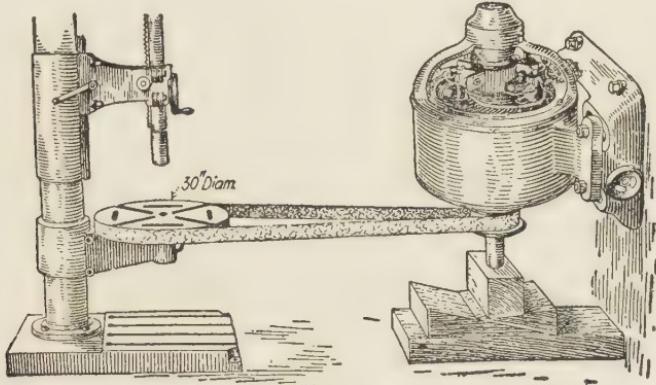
EMERGENCY ARRANGEMENT OF MOTOR AND DRILL PRESS
